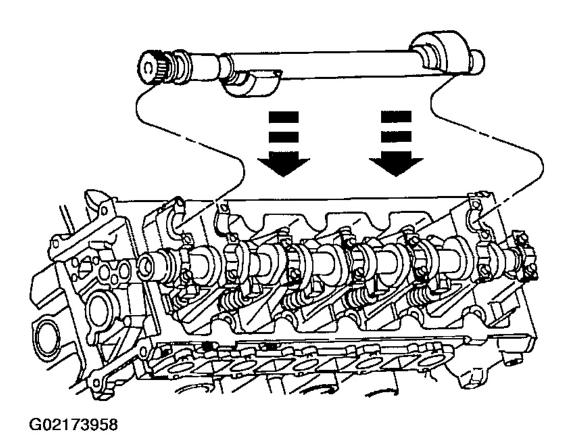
Positioning Balance Shaft On Journals Courtesy of FORD MOTOR CO.
